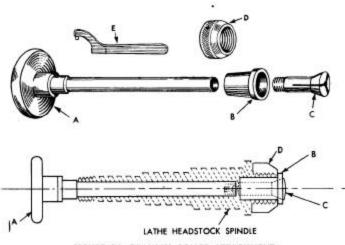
DRAW-IN COLLET ATTACHMENT
